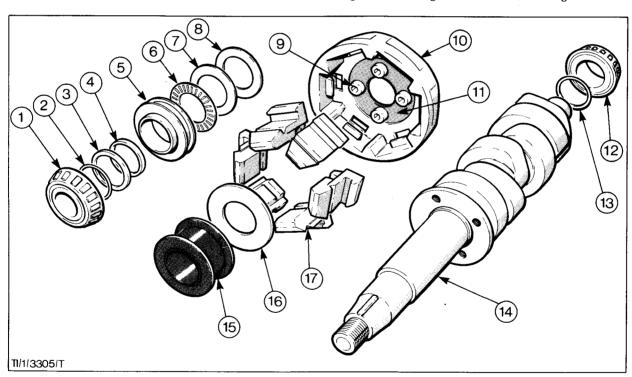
Camshaft and Governor Assembly Exploded (Dover)
